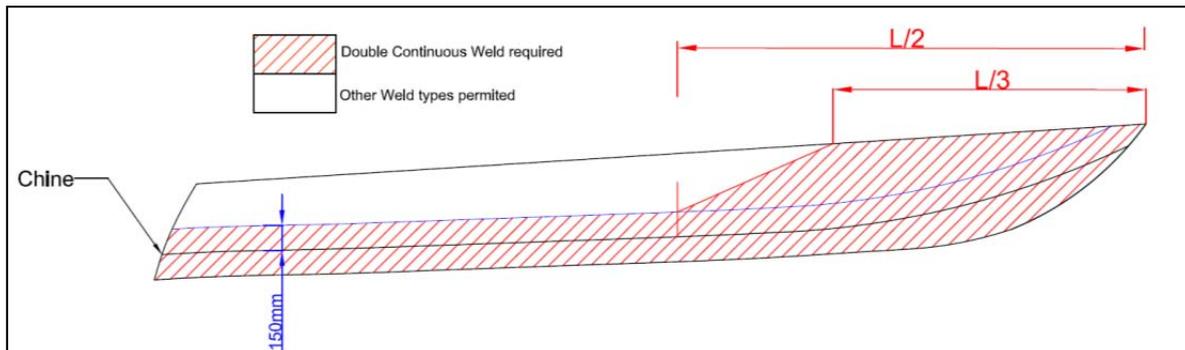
Defined area of double continuous welding (vessel without pronounced Bow Chine)
